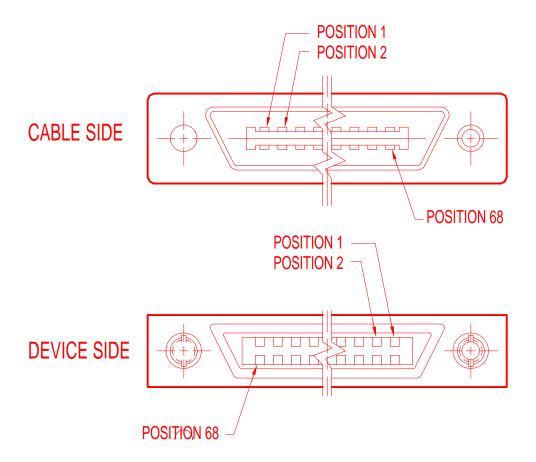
68-contact alternative 4 shielded contact positions (P cable/Q cable)
